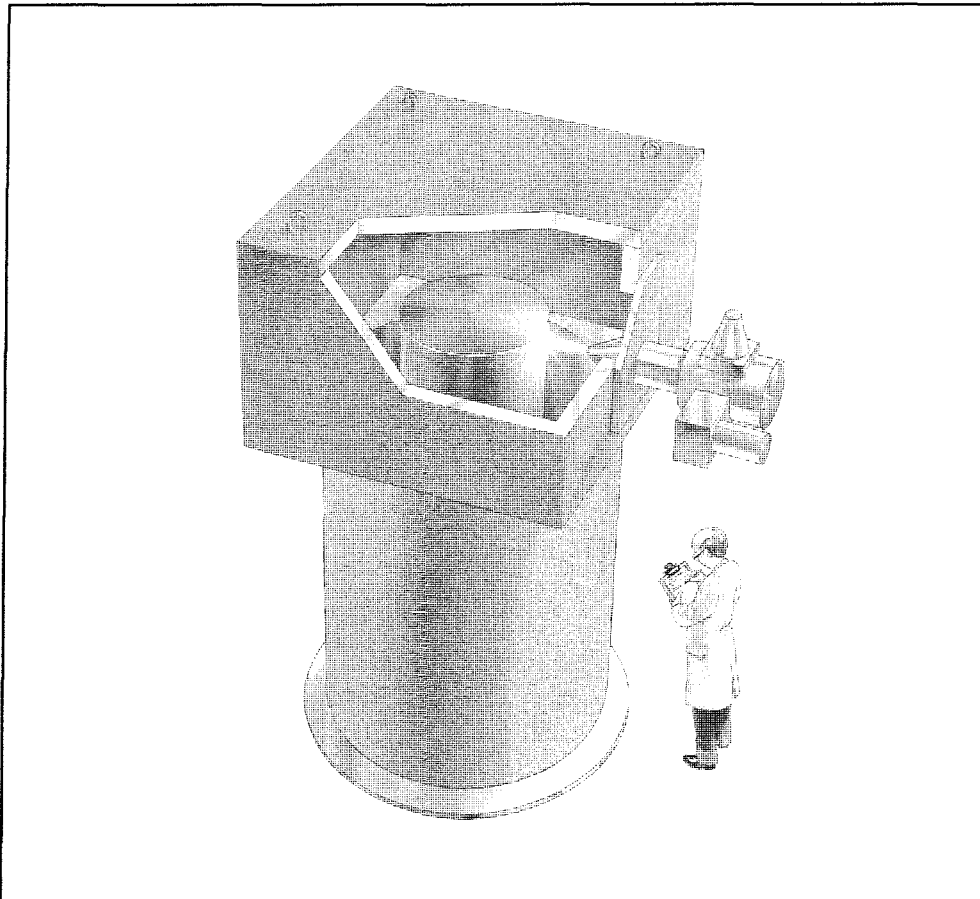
Electron beam welding of copper lid on copper cylinder.
